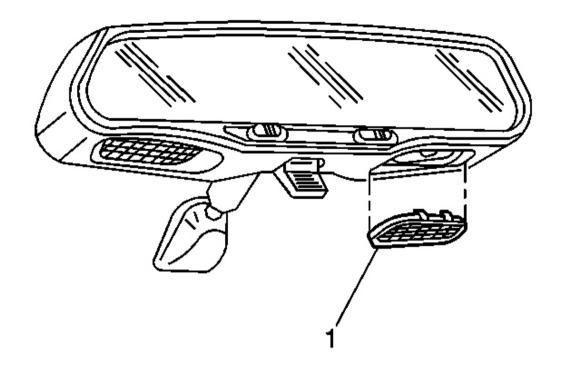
Lamp Lens To Mirror Housing Edge Nearest To Windshield Courtesy of GENERAL MOTORS CORP.
